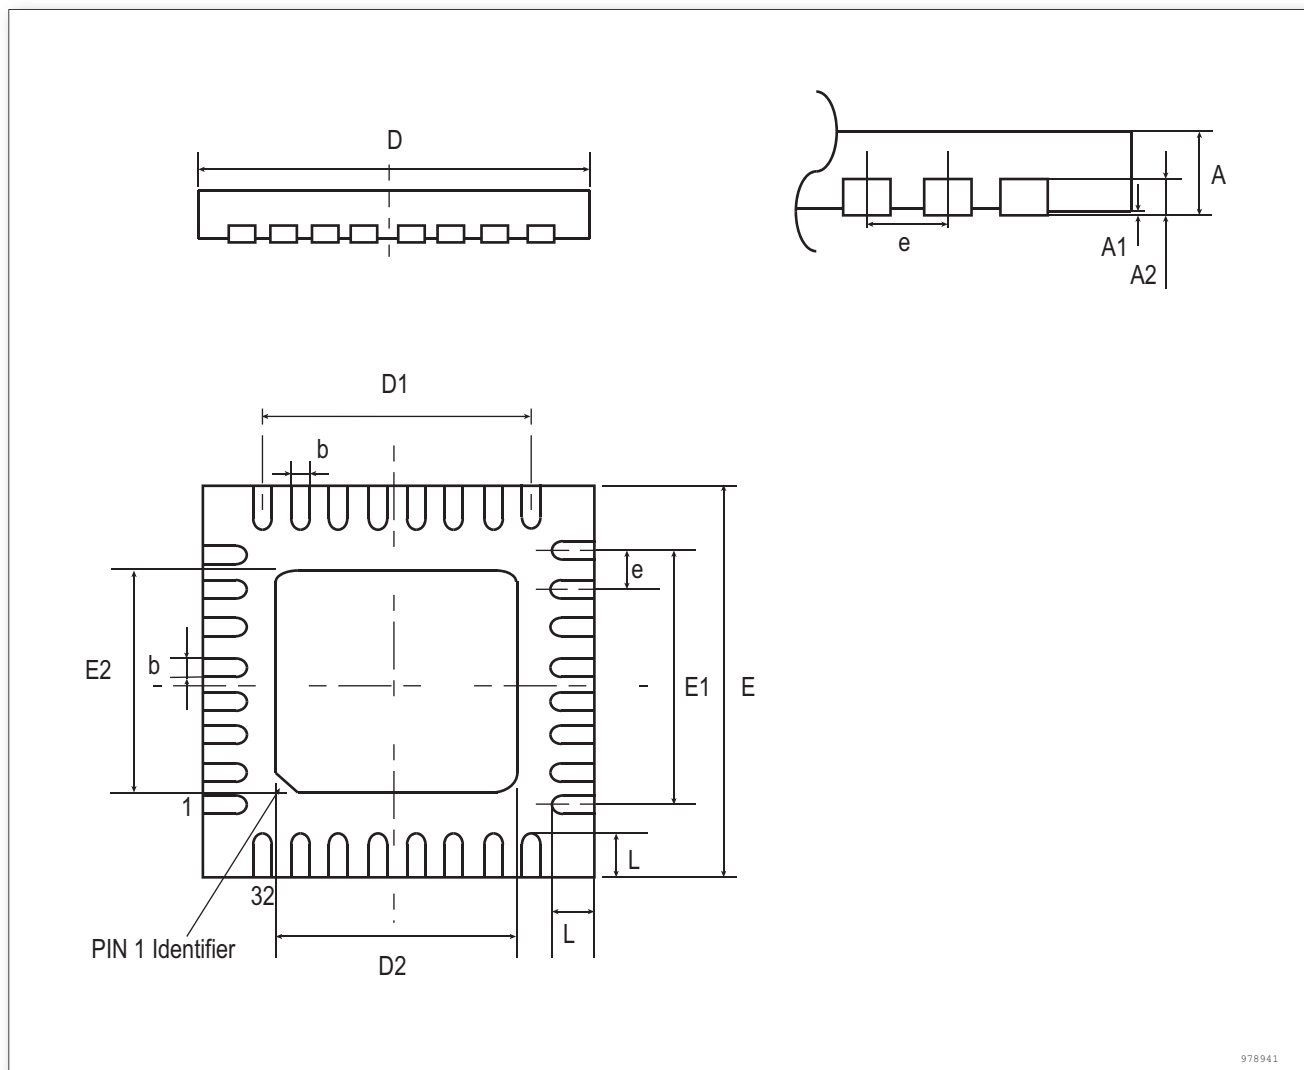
QFN32 - 32-pin quad flat no-leads package outline
